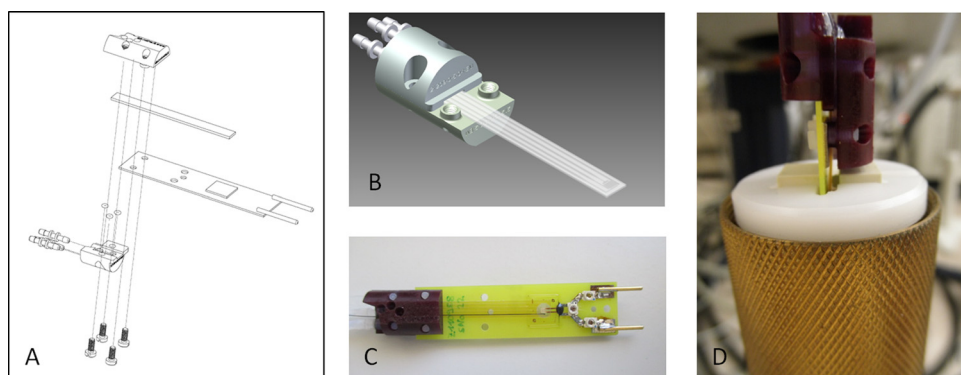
(a) View of the device parts assembly. (b) Cell culture chip packaged with microfluidic connections. (c) The PCB is screwed to the packaging to place the microcoil in close contact with the cell culture microchamber. (d) The system is mounted inside the NMR sensor.
